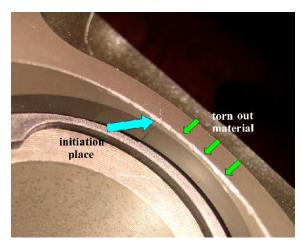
Split off piston edge of pivot after machining (full colour version available online)
